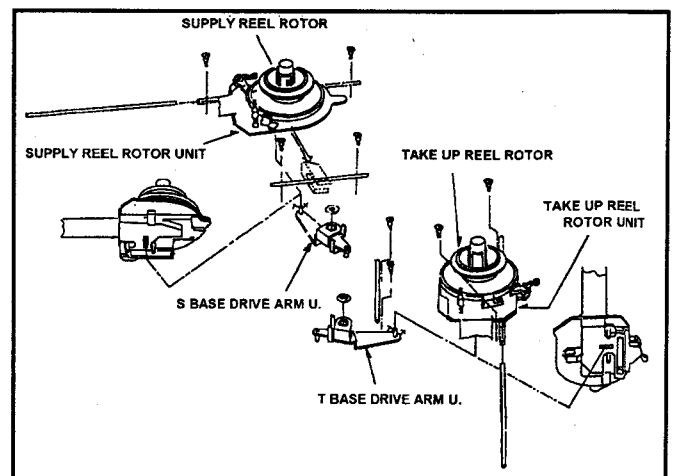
Install of S & T Reel Rotor Unit
